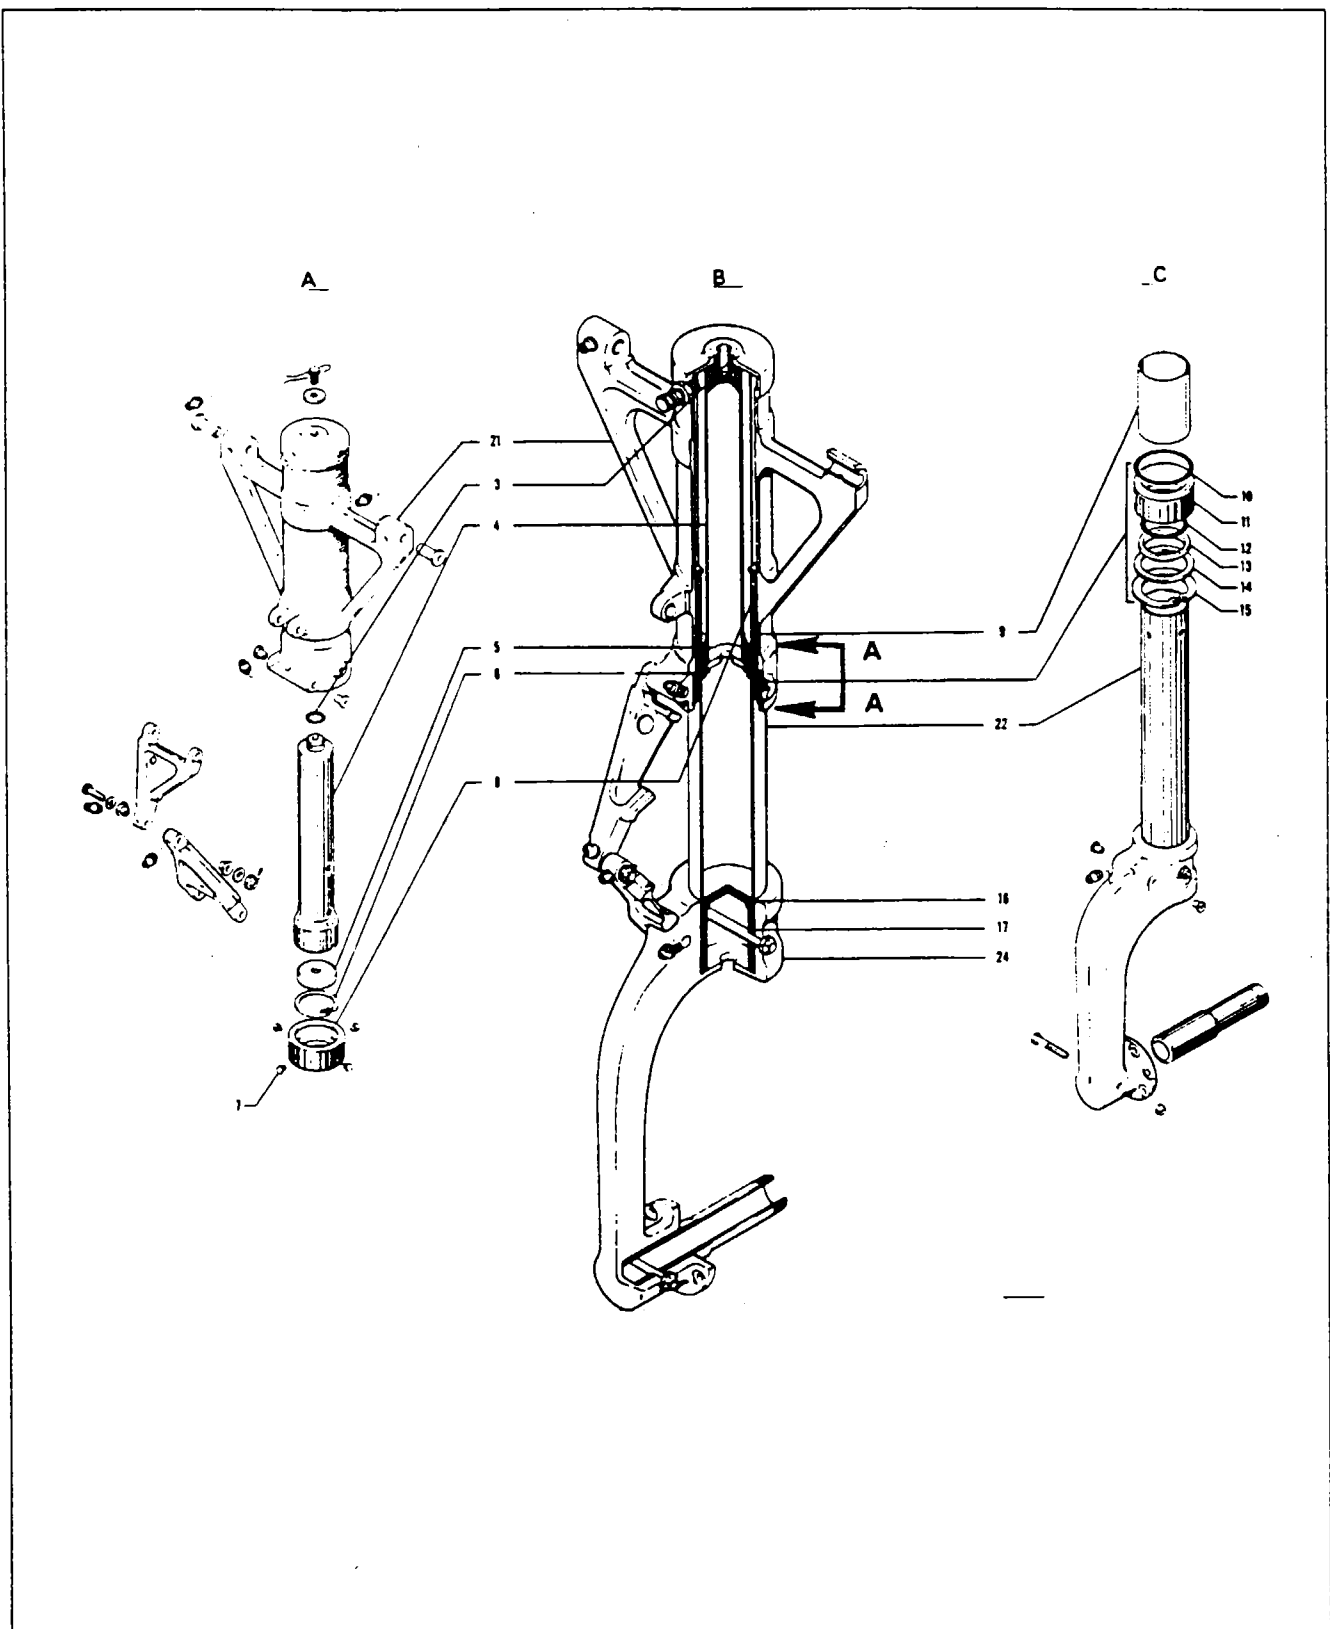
Main Gear Oleo Strut Assembly (cont.)
